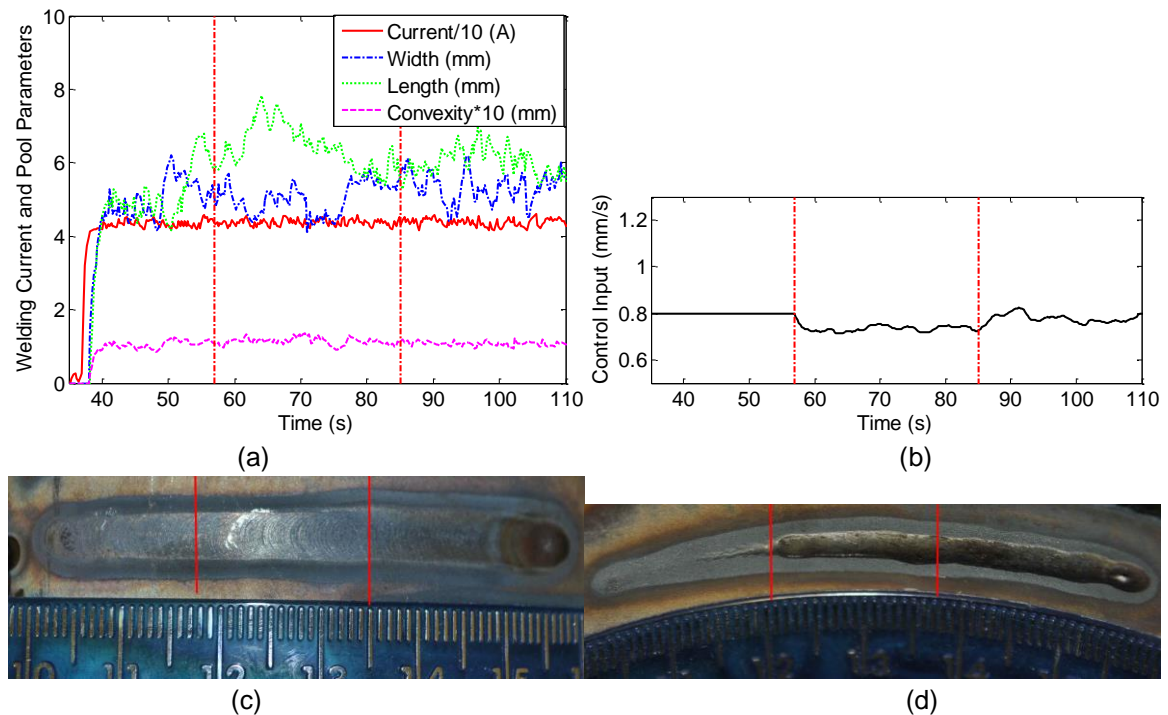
Experiment 1 results (a) Welding current and weld pool parameters (b) Control input (c) Front-side bead (d) Back-side bead.
